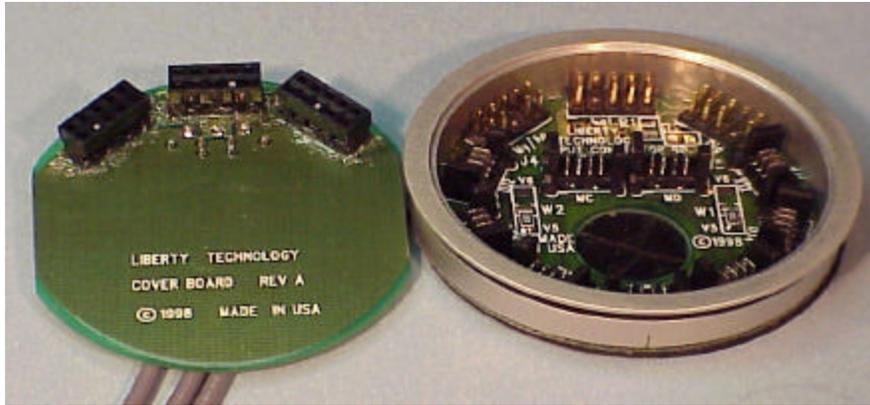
Cover Board before assembly onto the Input Board. (The alignment marks in Figure 6 may make it easier to see when to push the two pieces together.)
